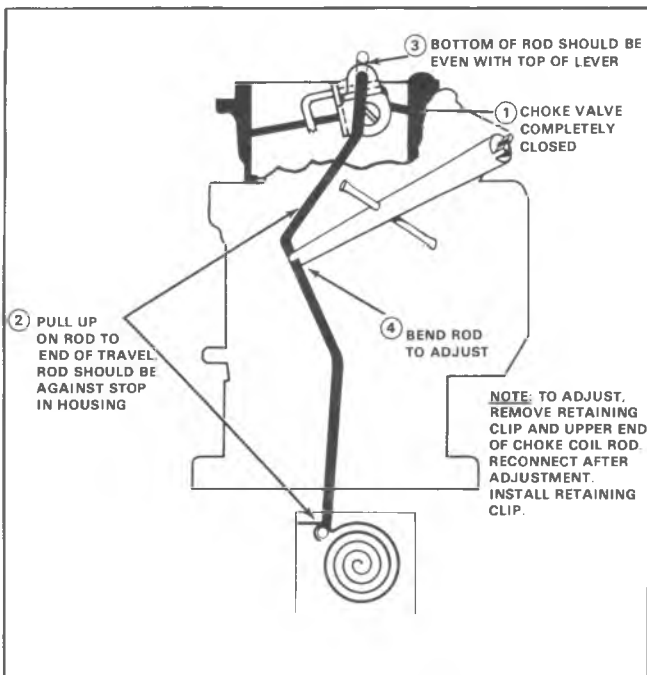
Choke Coil Rod Adjustment - Lt. Duty Emissions
